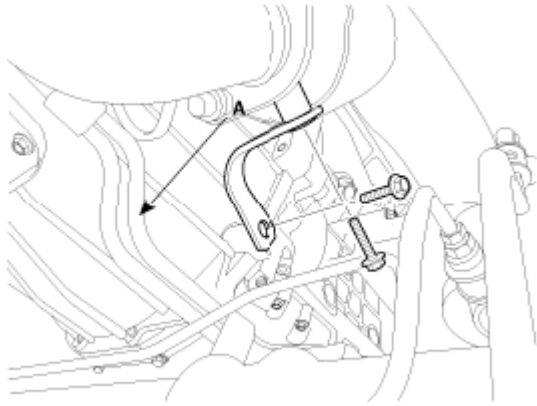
Identifying RH Exhaust Manifold Stay Bolt
